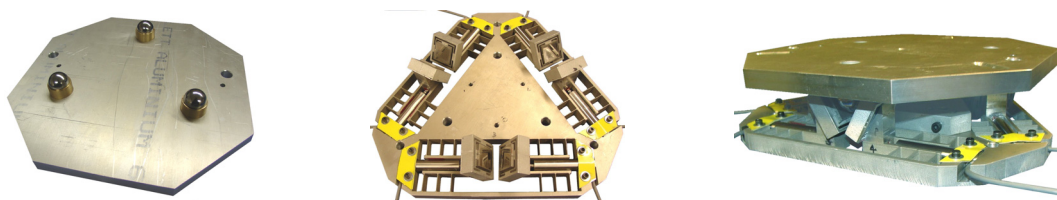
Prototype moving groove HPF, fixture envelope is 250mmx250mmx80mm
